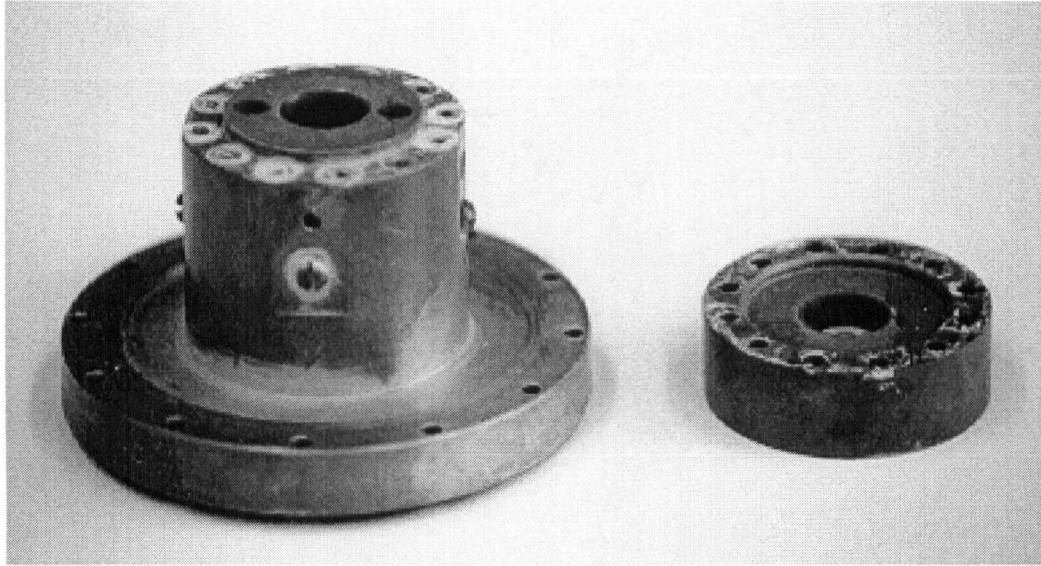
Photo of the original design. On the left is the upper portion with the large vacuum flange and on the right is the bottom cap. Corrosion from etchants is clearly visible.
